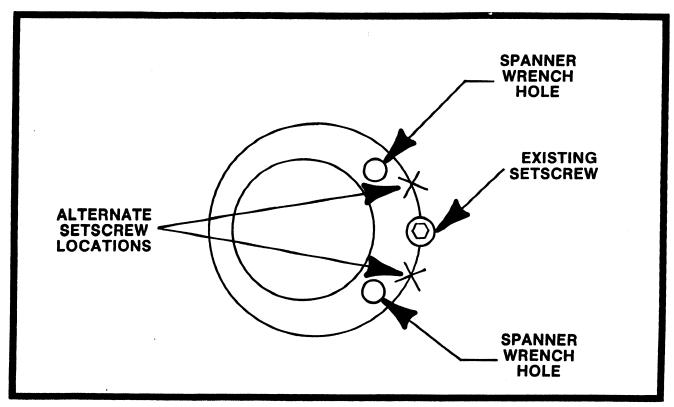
Telescope Cylinder Eccentric Bushing.
